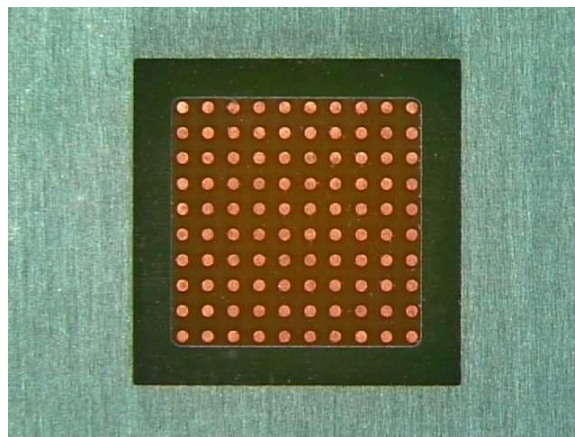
Pad Size (0.15 mm) x Pad Space (0.15 mm)
